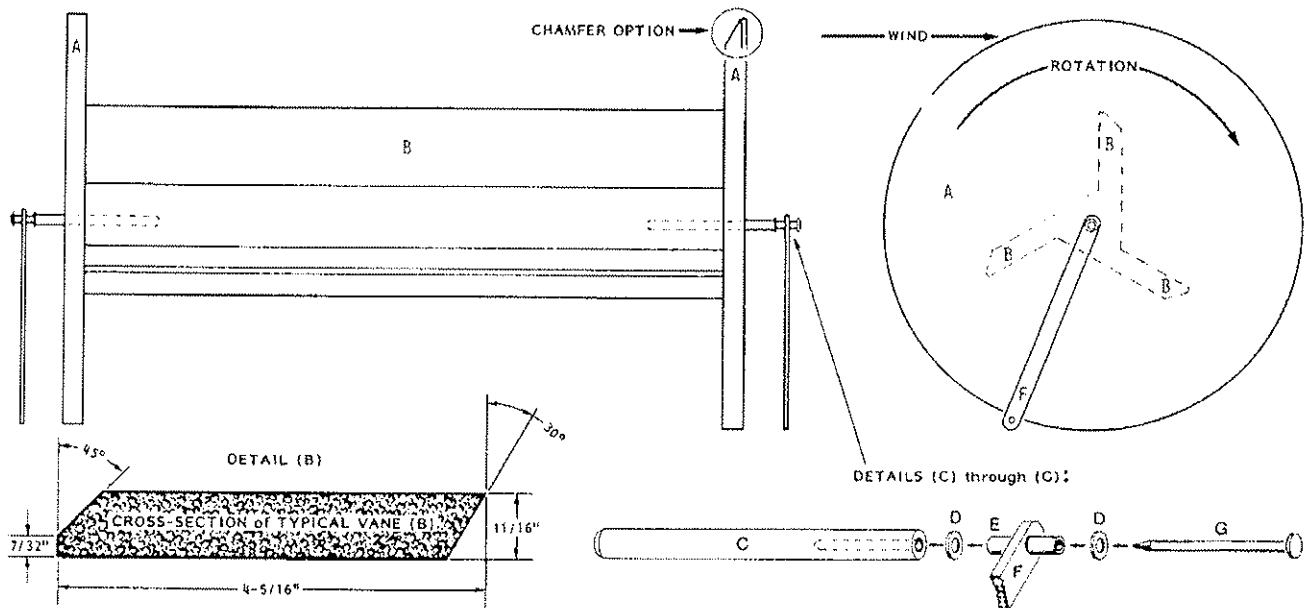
Hornbeam Rotor 661 Kite Details—Make two End-plate Disks (A) of 11/16" thick styrofoam. Drill a 1/4" diameter hole in each center; finish outside diameters to 13-1/2". Make three Rotor Vanes (B) 20-1/2" long; accurately reproduce the cross-section that is shown in Detail B. Make two Pivot Bosses (C) of 4" lengths of 1/4" diameter birch dowel; chamfer one end of each; drill the other ends—accurately centered—3/32" diameter and 1" deep. Purchase or make four Washers (D): 1/4" outside diameter; 0.100" bore (use brass, steel, or nylon about 0.020" thick). Make two Pivot Bearings (E) of brass tubing: 1/8" outside diameter; 0.013" wall thickness; 3/4" long. Make two Leaders (F) of 1/8" x 3/8" x 7-1/2" spruce; drill 1/8" diameter holes 1/4" from the ends. Use epoxy cement to fix each Pivot Bearing (E) in one end of each Leader (F) (see detail). The two Pivots (C) are made from six-penny (6d) iron box-nails (0.093" in diameter and 2" long; file and polish away any asperities that were caused by the pointing and cold-heading process.)
